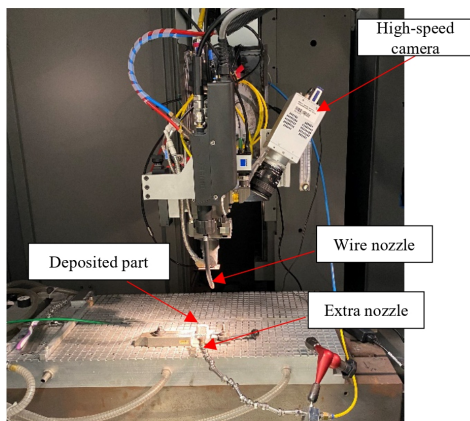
Apparatus of the lateral wire-laser metal deposition.
